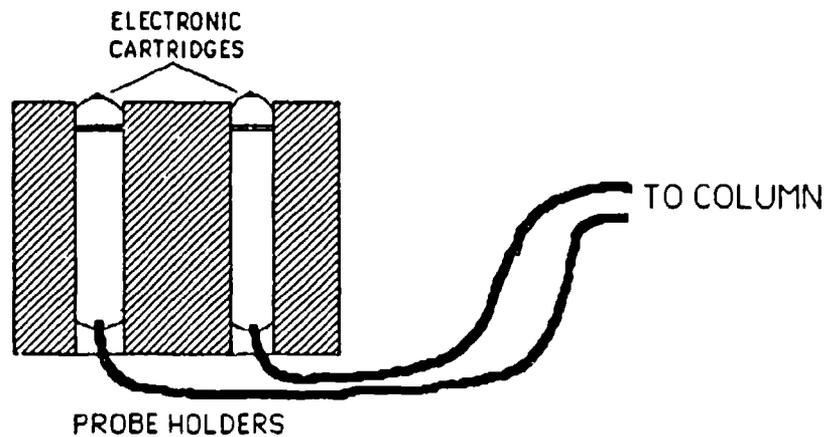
Bore Adaptors, Fixtures and Special Probe Holders
